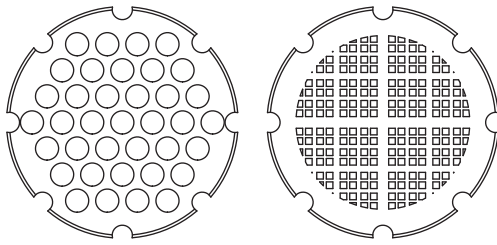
Left: Grid used to stabilise laminar flames in the lower nozzle. Right: Fractal grid with largest and smallest fractal bar widths of 2.0 mm and 0.5 mm used in the upper nozzle.
